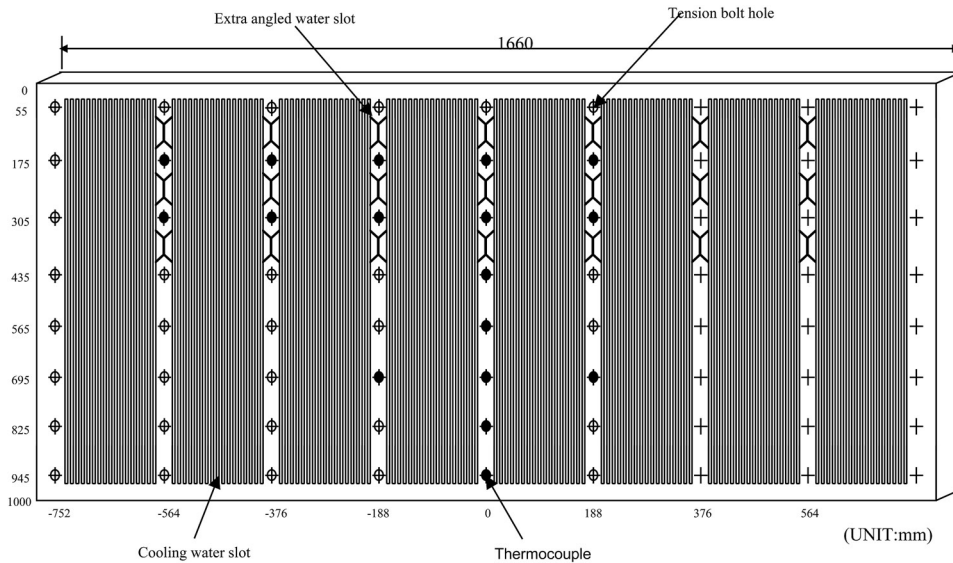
Back view of the broad face of the parallel mold showing slot geometry and thermocouple locations in bolt holes (solid circle).
